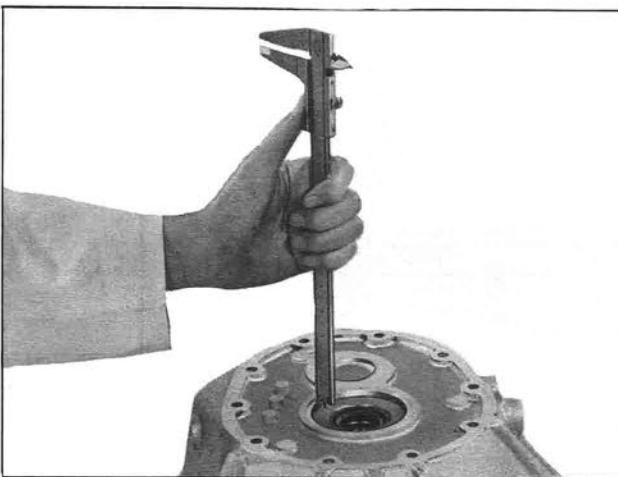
Selection main drive bearing spacer (Measuring depth "A")
